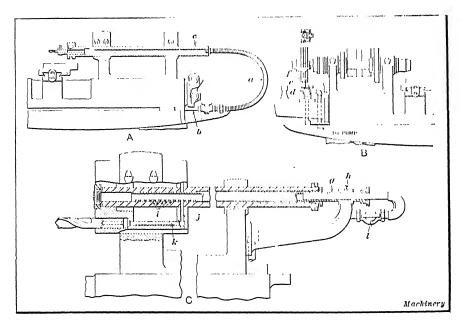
Examples from Practice in delivering Coolant to Oil-tube Tools
